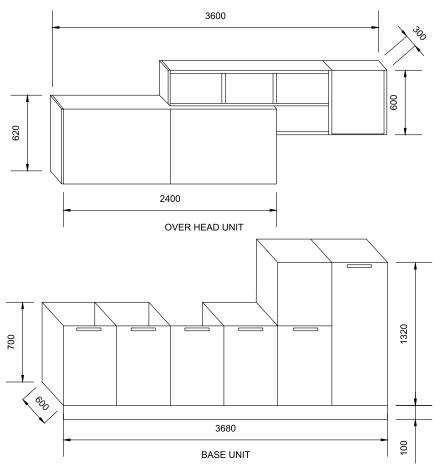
Layout Plan of Straight Line Kitchen
